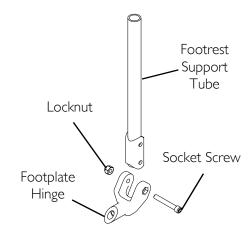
Installing Adjustable Angle Flip-Up Footplate Hinge
